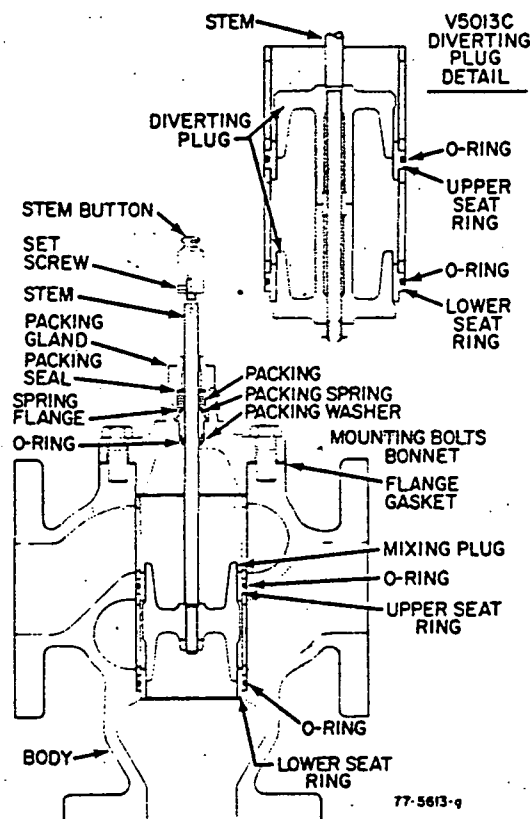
Cutaway of Typical V5013B Flanged Type Body and V5013C Diverting Plug.
